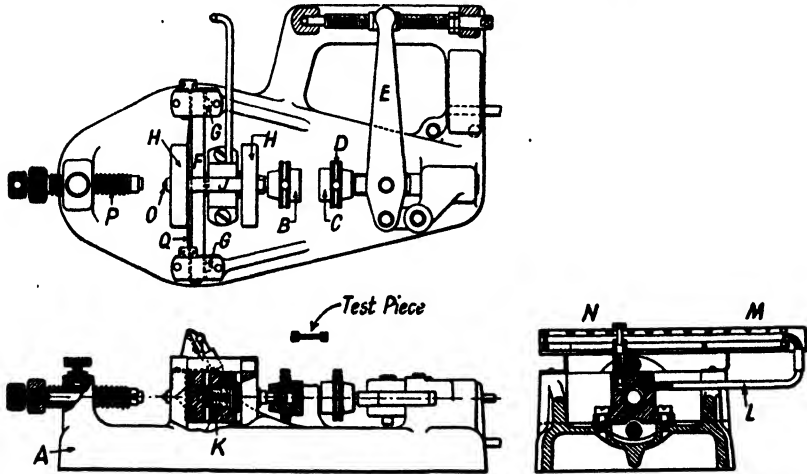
THE HOUNSFIELD TENSOMETER TESTING MACHINE
